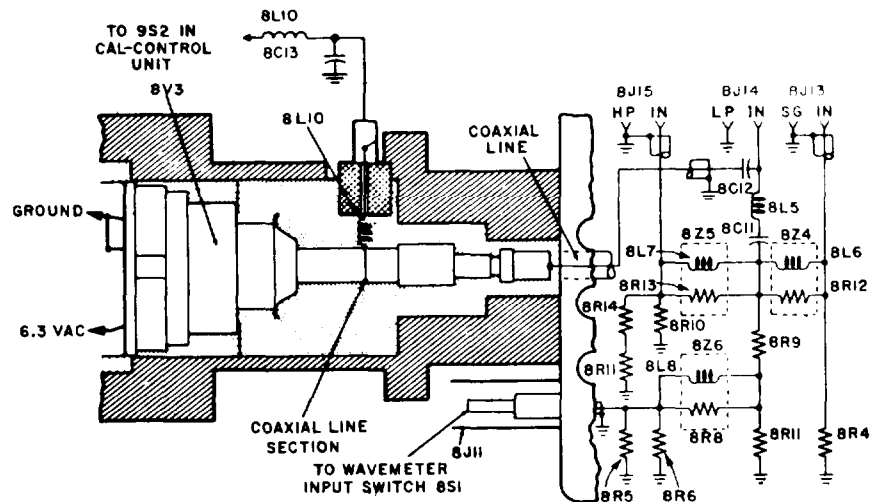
Demodulator Assembly 8A4, Functional Drawing
